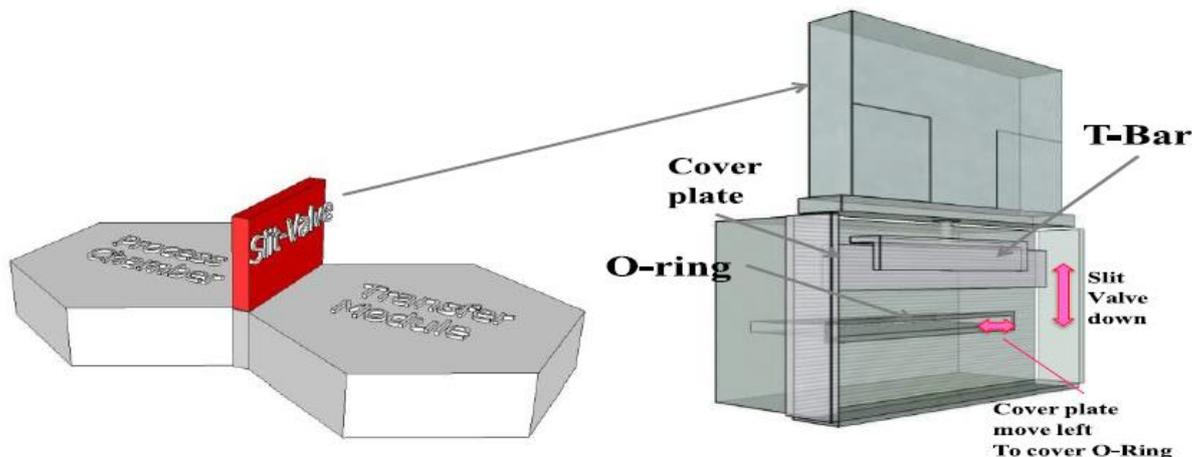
Pictorial view of slit valve and chamber (Sheu and Hou, 2012)
